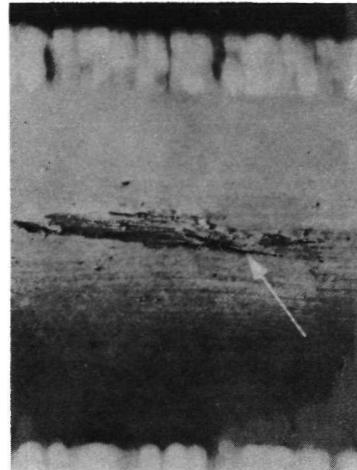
HYDRAULIC TUBING DISCONTINUITY
